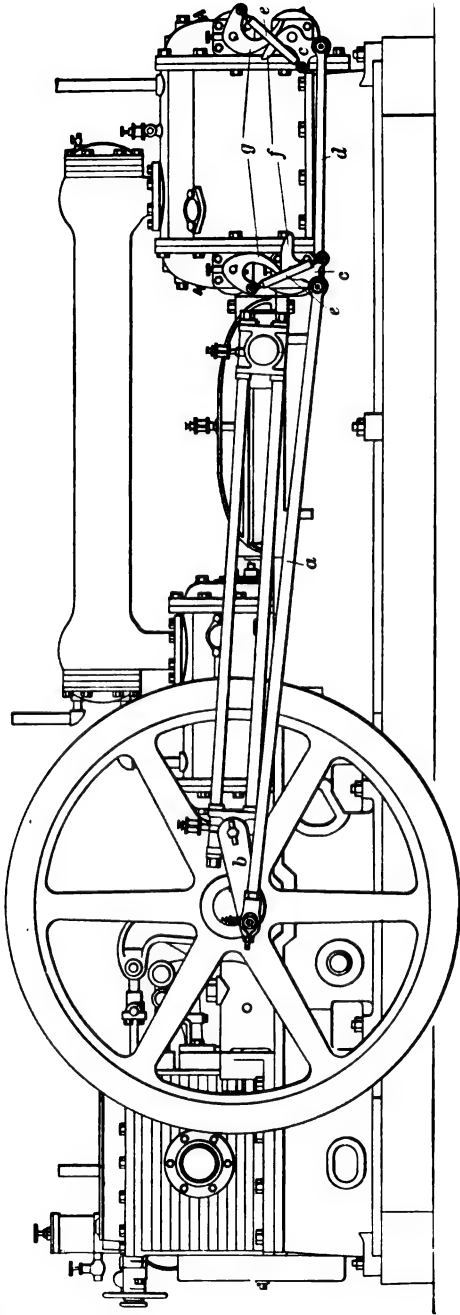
Valve Motion of Low-Pressure Air Cylinder. Norwalk Compressor.
